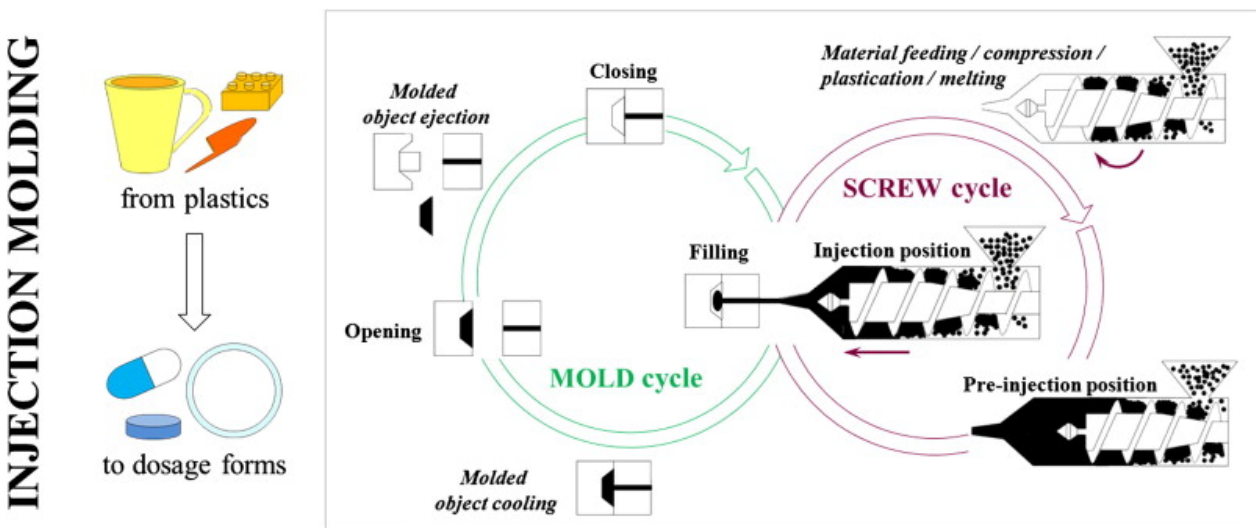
Graphical representation of the injection molding cycle [2]: Using injection molding technique for drug delivery.
